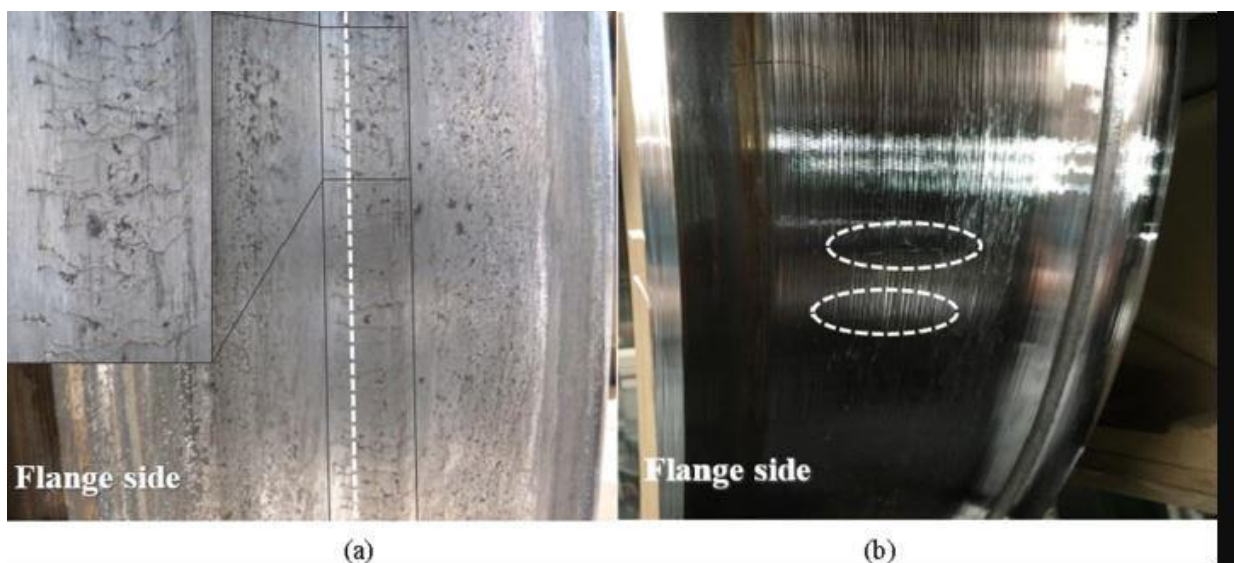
Photographs (a) and (b) showing RCF cracks on wheel tread surface(Y. Liu et al. 2020)
